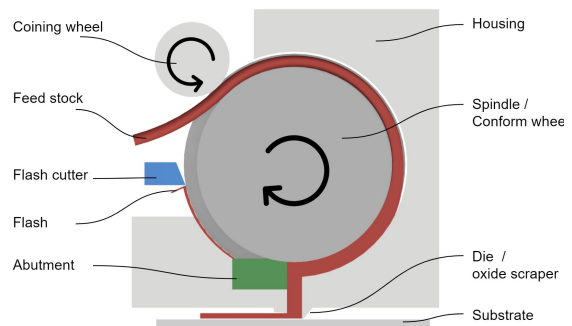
Principal illustration of the Spindle extruder when used for additive manufacturing
